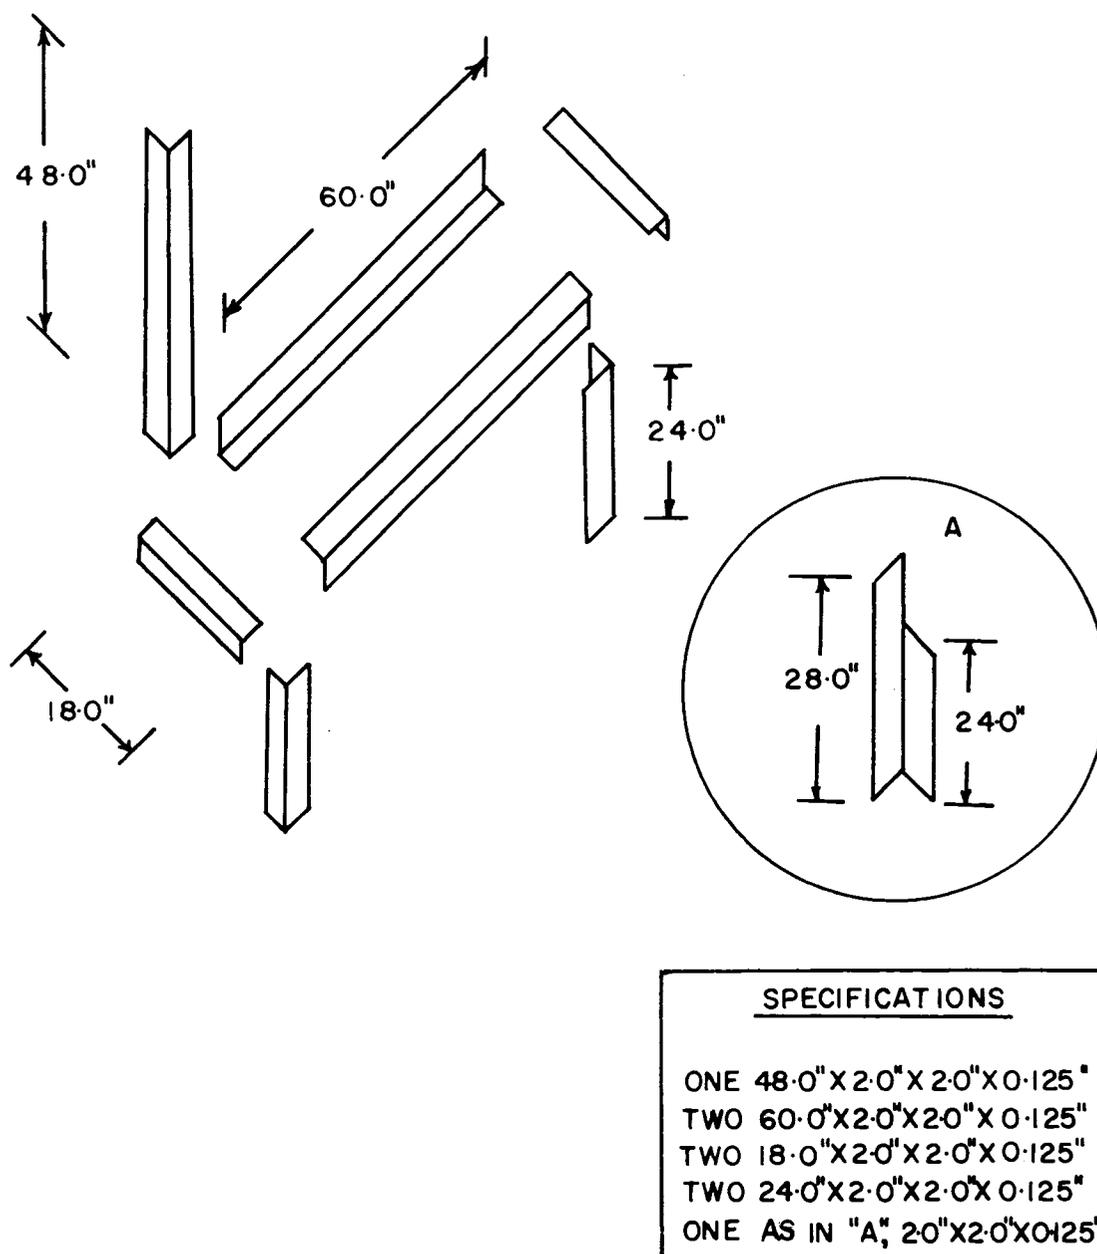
EXPLODED VIEW INDICATING ANGLE IRON LAYOUT FOR PROTECTIVE SHIELD. NOT TO SCALE
